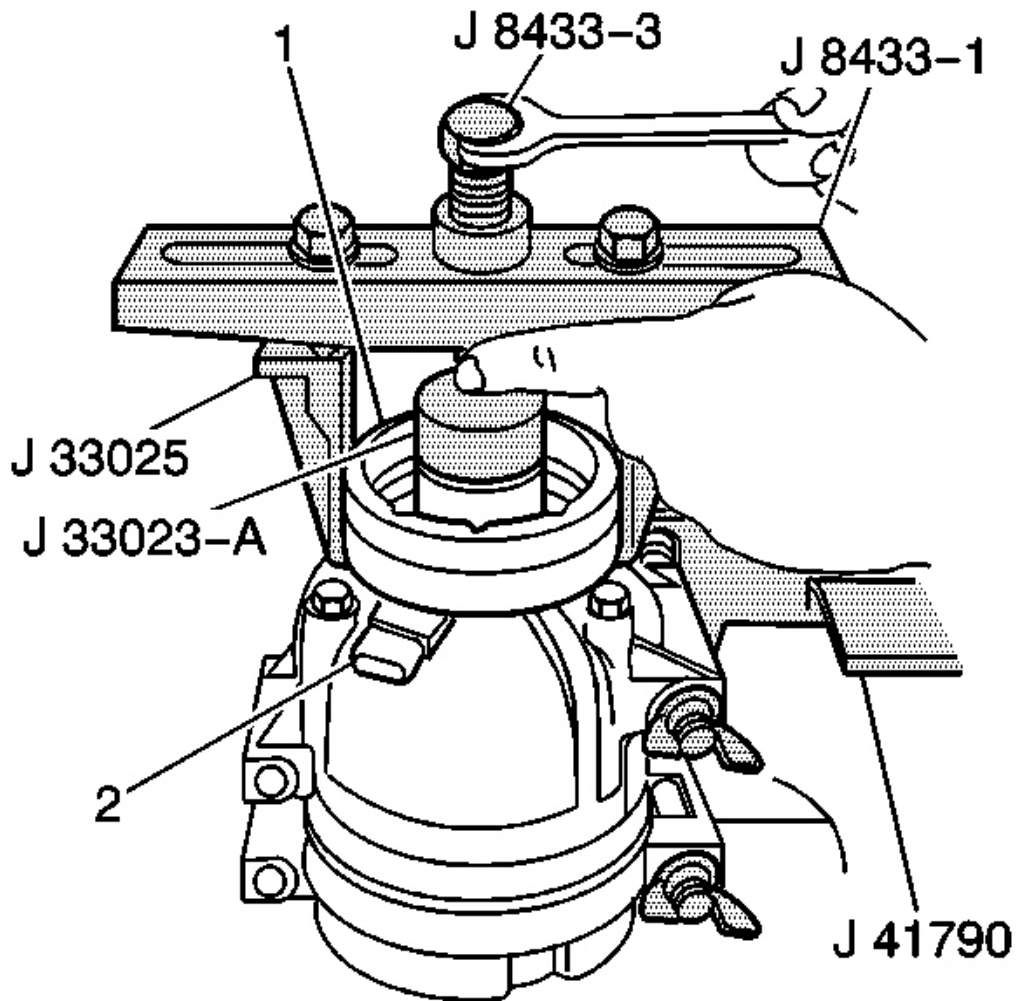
J 33025, J 8433, J 8433-3, J 33023-A & A/C Compressor Clutch Coil
